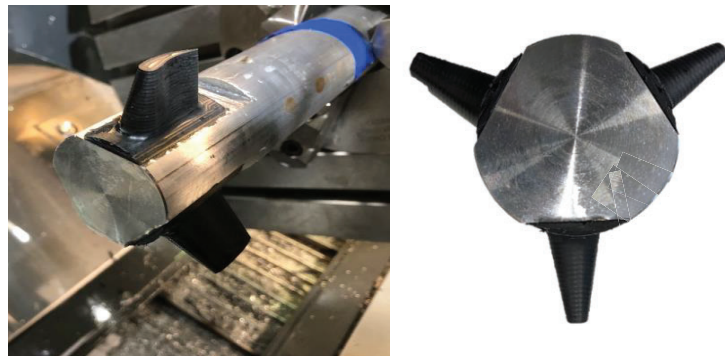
Aluminum rod with ABS/CF plastic deposited and machined using dovetail root concept
